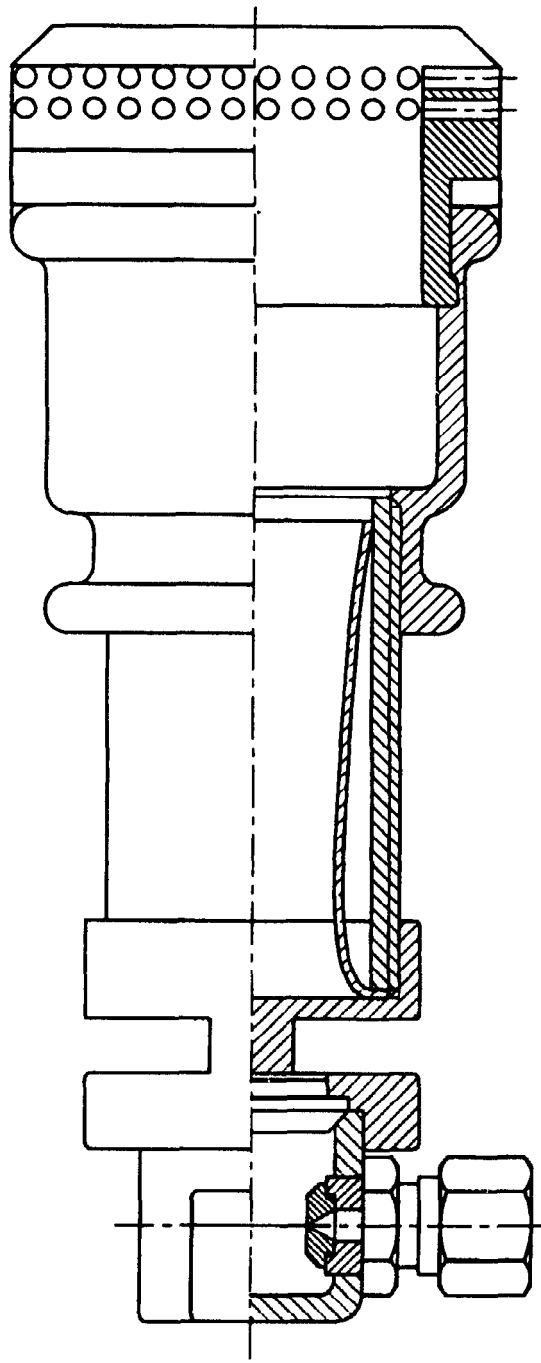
M-TYPE BURNER (ASSEMBLY)
